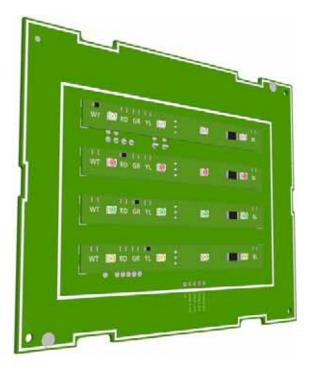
Corridor lamp PCB with 4 LED lamp boards
